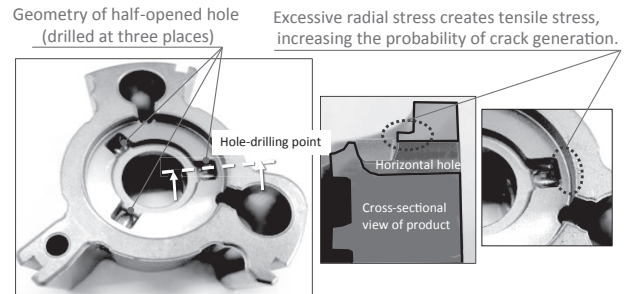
Geometry of Horizontal Hole to be Drilled by Green Machining and Cross-Sectional View of Product
